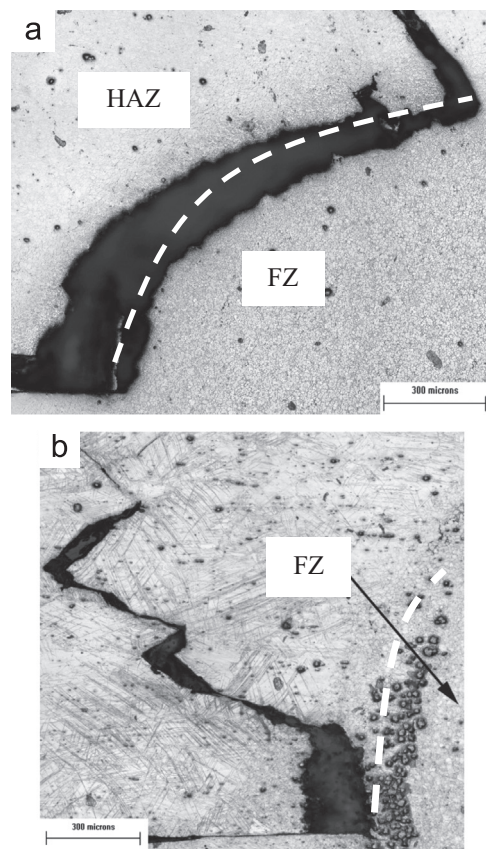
Typical crack propagation path of the AZ61 RSW weld samples in (a) as-welded condition and (b) heat treated condition.
